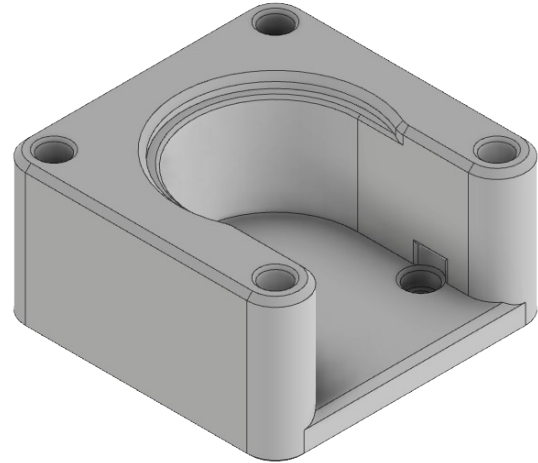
Isometric view of CAD design for ClearPath mounting adapter
